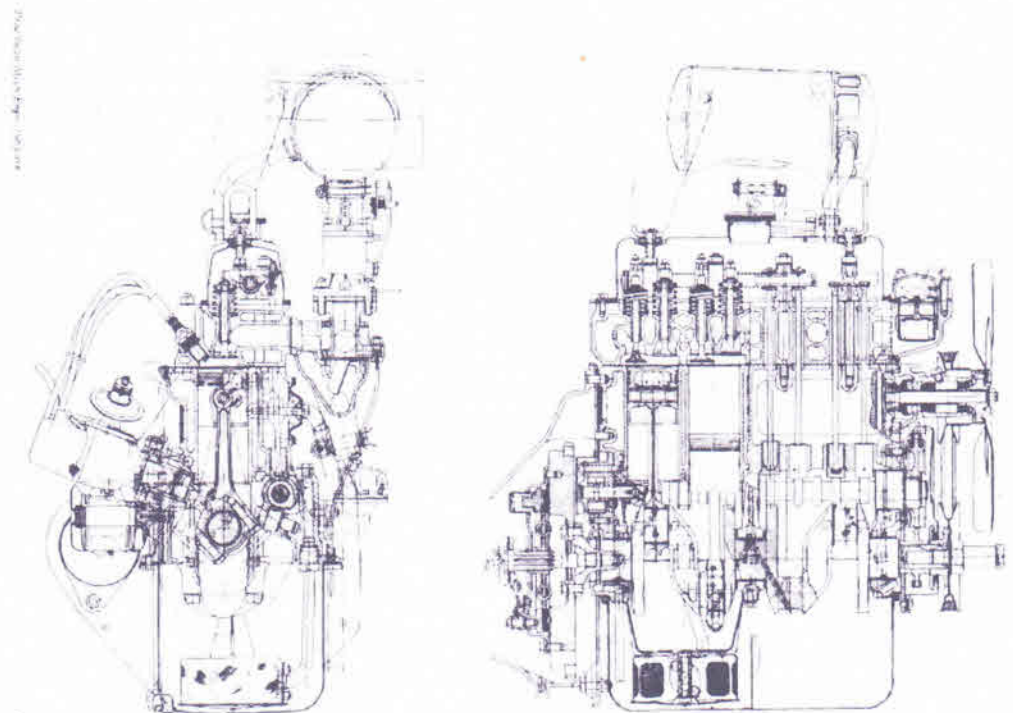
Arrangement of 800 cc engine: longitudinal and cross sections
